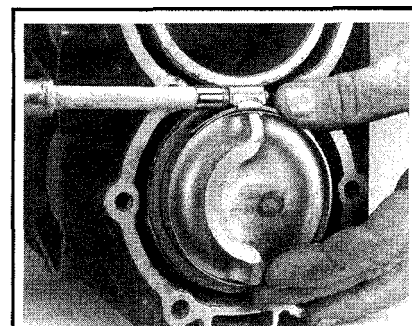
if not, a suitably sized, smooth inner surface band-type hose clamp can substitute for a ring compressor
